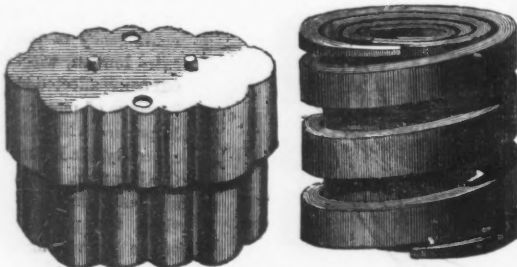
Union Car Spring. Fig. 8.—Union Car Spring with Cap closed. Fig. 9.—The Hebbard Spring.
